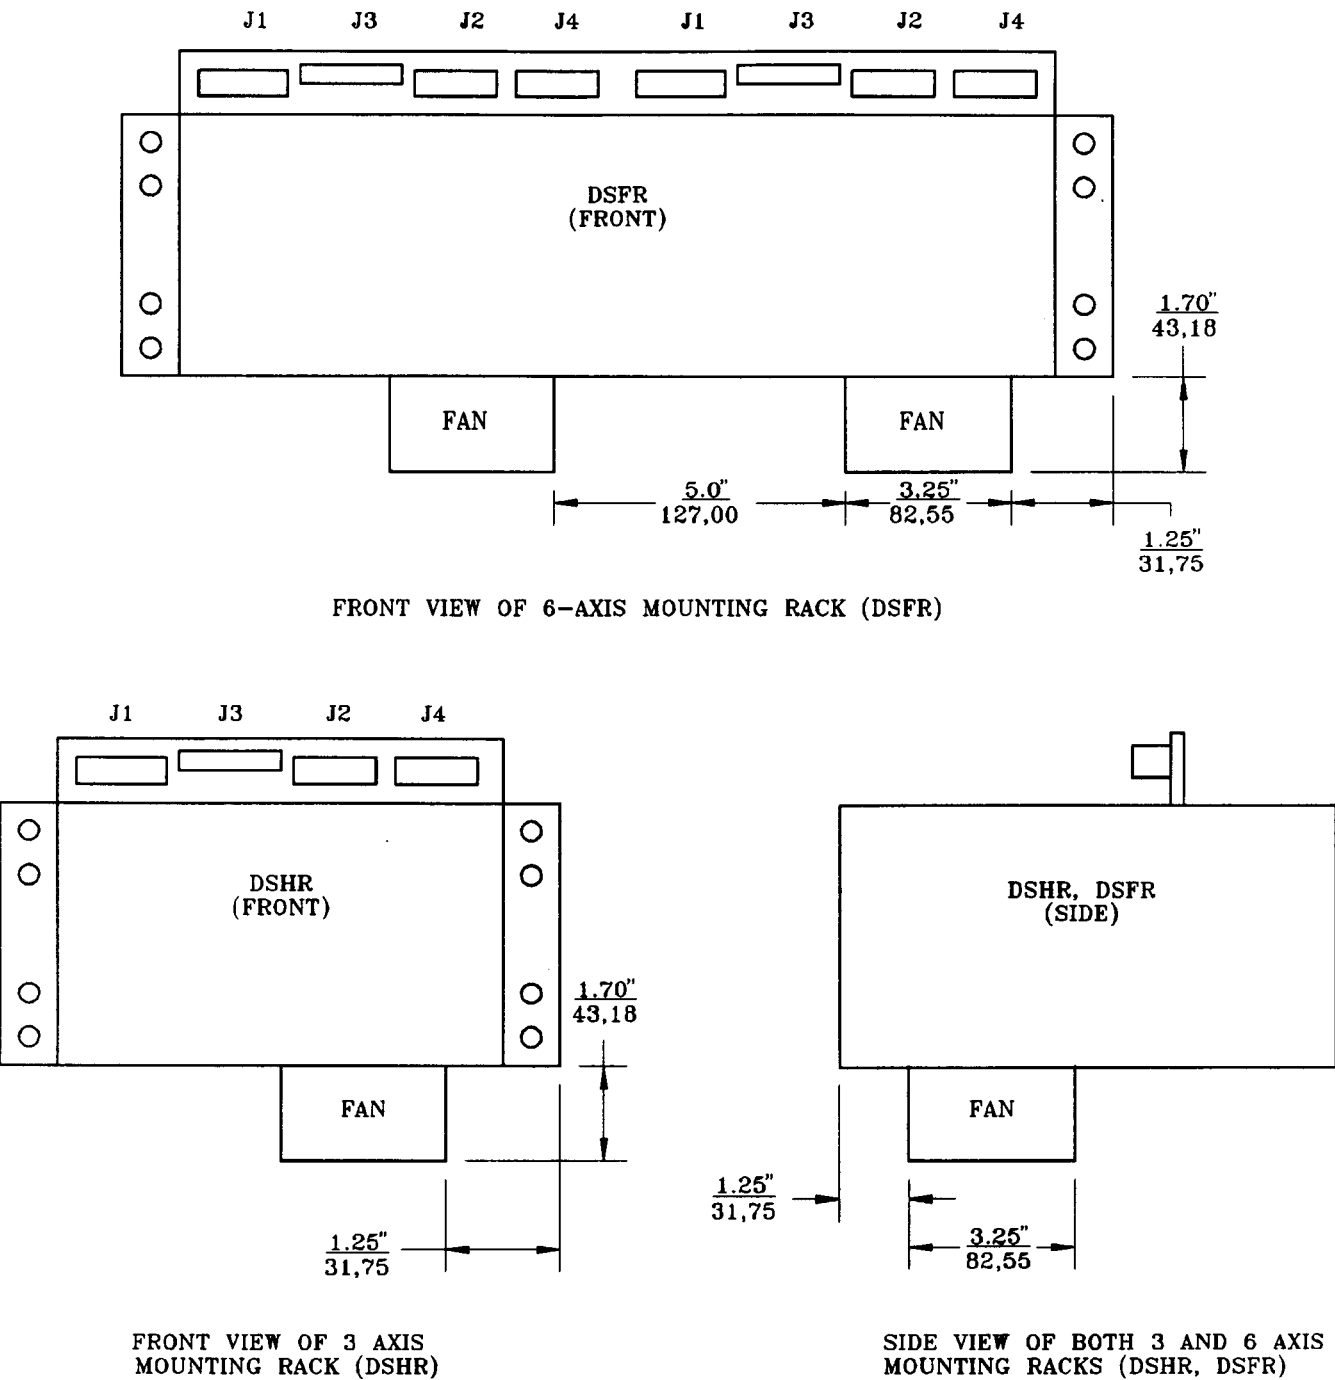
DSHR and DSFR Fan Option Dimensions
